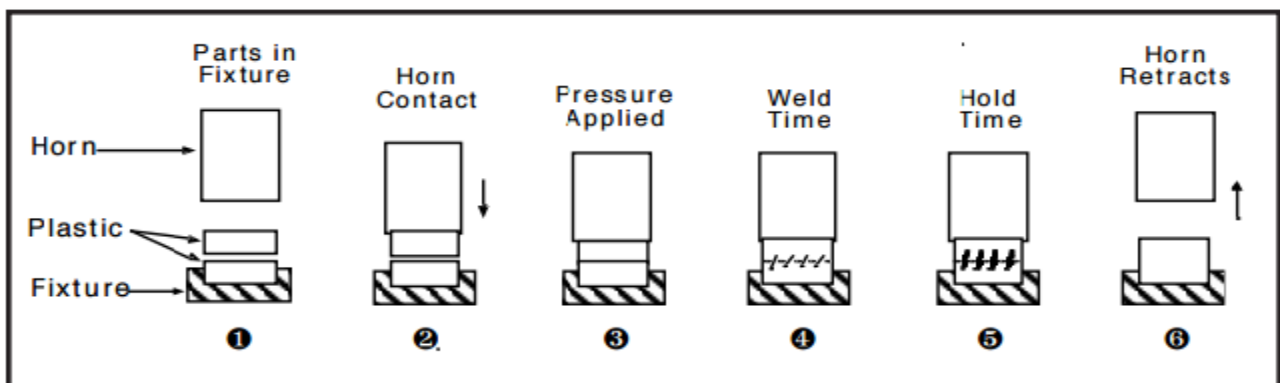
Ultrasonic welding, (1) Parts in Fixture, (2) Horn Contact, (3) Pressure Applied, (4) Weld Time, (5) Hold Time, (6) Horn Retracts
